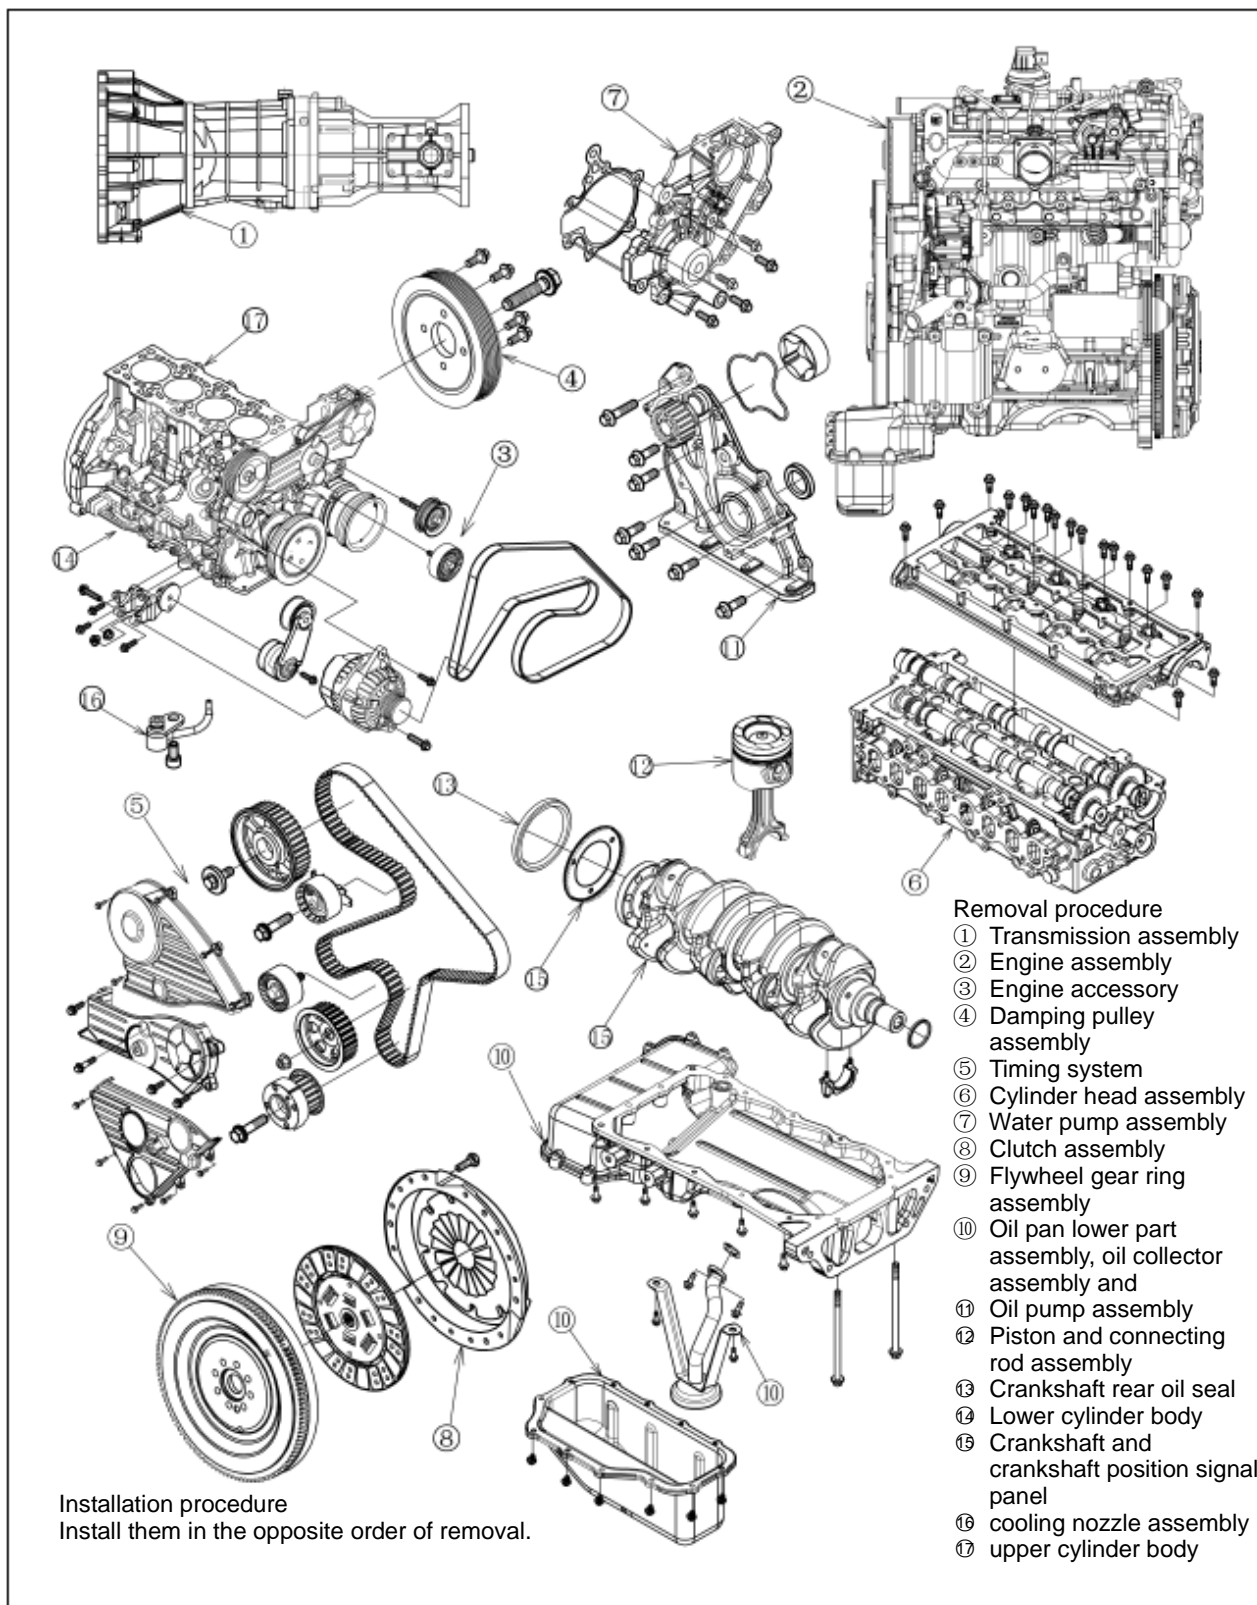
Cylinder Body Assembly Removal Procedure
